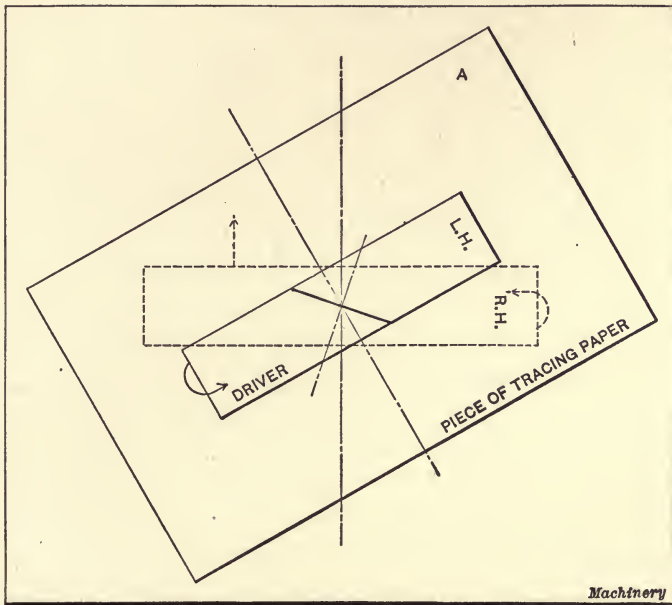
Method of using Tracing Paper for Spiral Gear Problems
